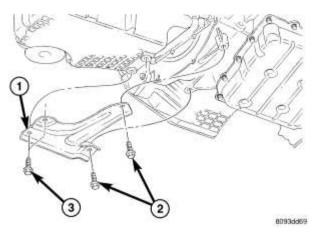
View Of Structural Collar (Note: Cross-Under Pipe Not Shown)
